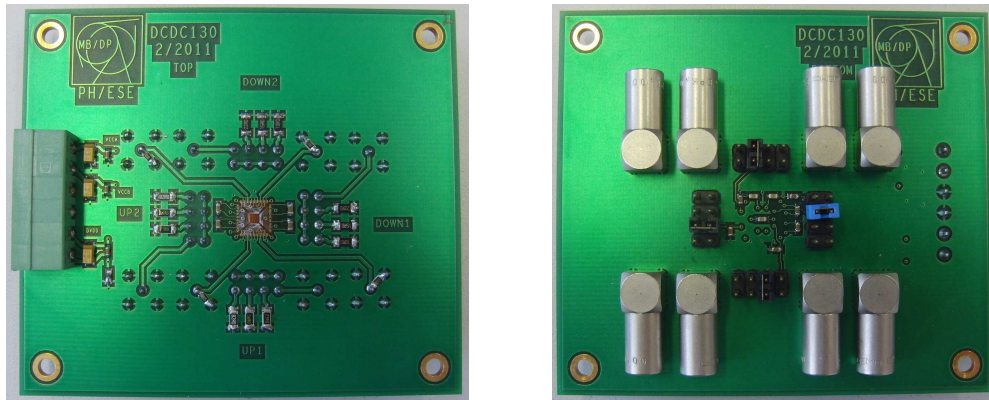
PCB with the prototype chip used for tests of the switched capacitor DC-DC converters.
